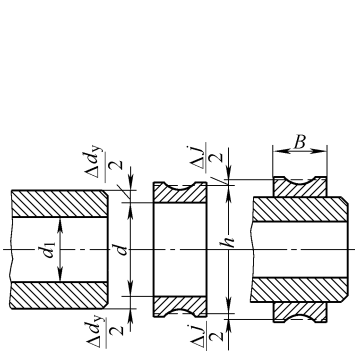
14 Geometric dimension after matching bearing inner ring to shaft
